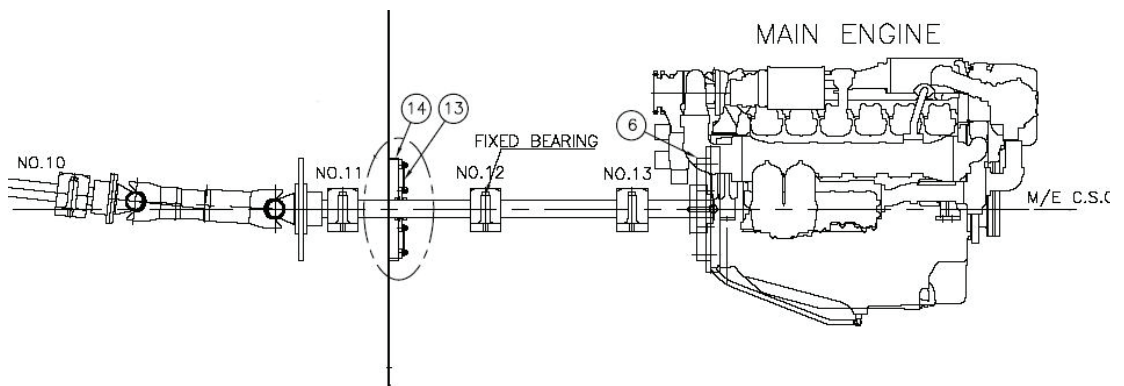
Cardan shaft with intermediate shaft bearings on the marine propulsion shaft system
